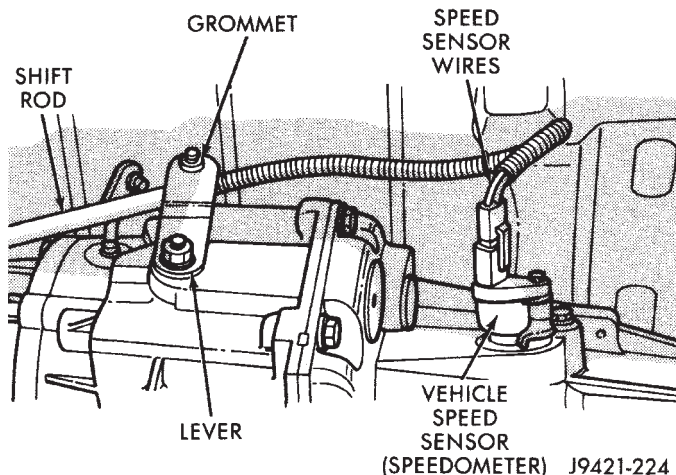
Shift Rod And Speed Sensor Wire Attachment
